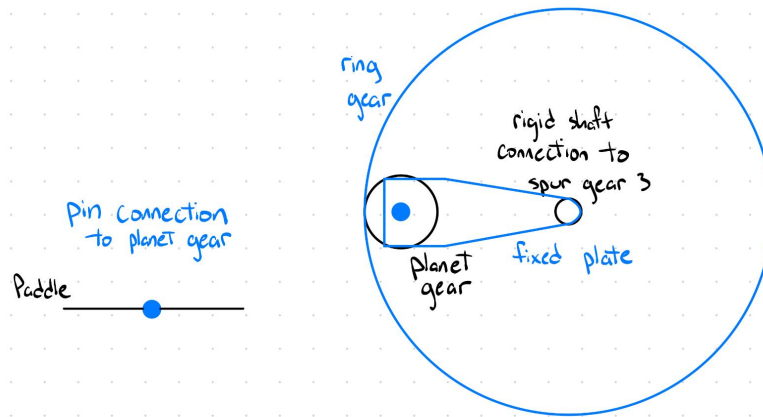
Top-down view of planetary gear system with labels showing connection to spur gear train and into the mixer paddle.
